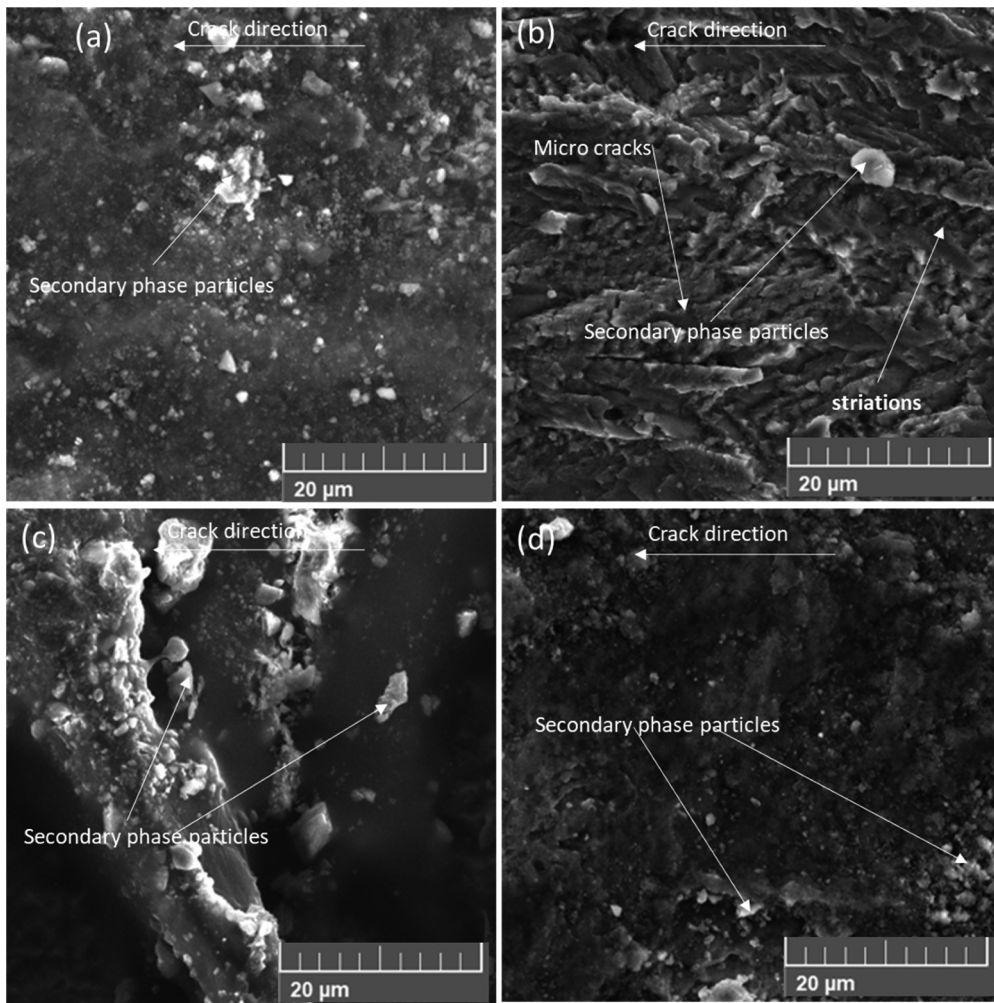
Fatigue crack propagation morphology of Al alloy 7075-T6, (a) CPS – countersunk rivet hole, (b) CPF – countersunk rivet hole, (c) CPS – perpendicular rivet hole, (d) CPF – perpendicular rivet hole.
